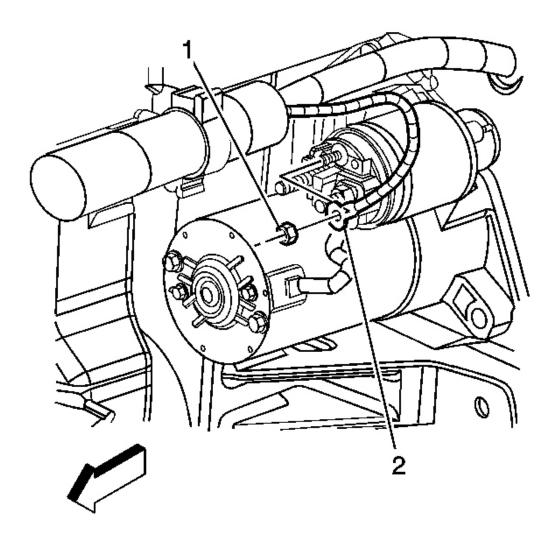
View Of Starter Solenoid S-Terminal Lead & Nut Courtesy of GENERAL MOTORS CORP.
